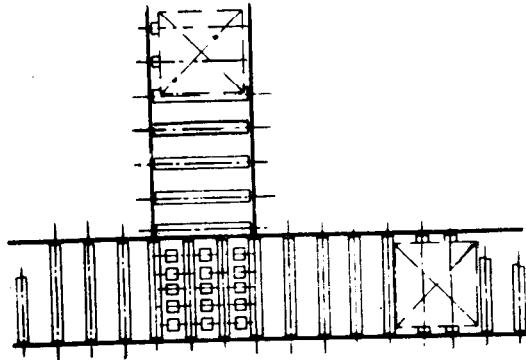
TRANSFER ROLLER CONVEYOR, RIGHT ANGLE TYPE
